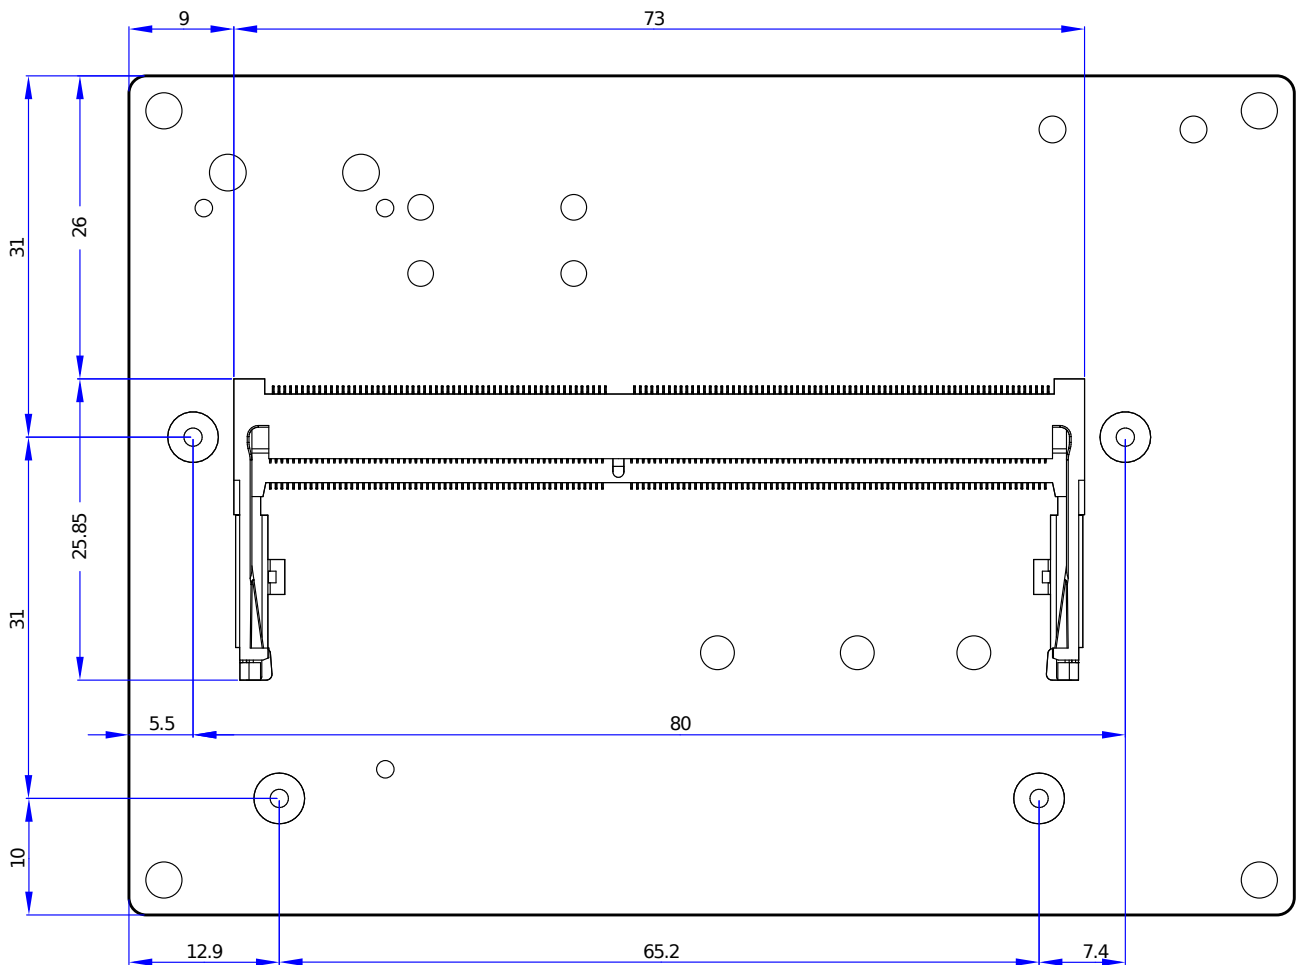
Mallow Carrier Board dimensions (in millimeters) - bottom side (bottom view)
